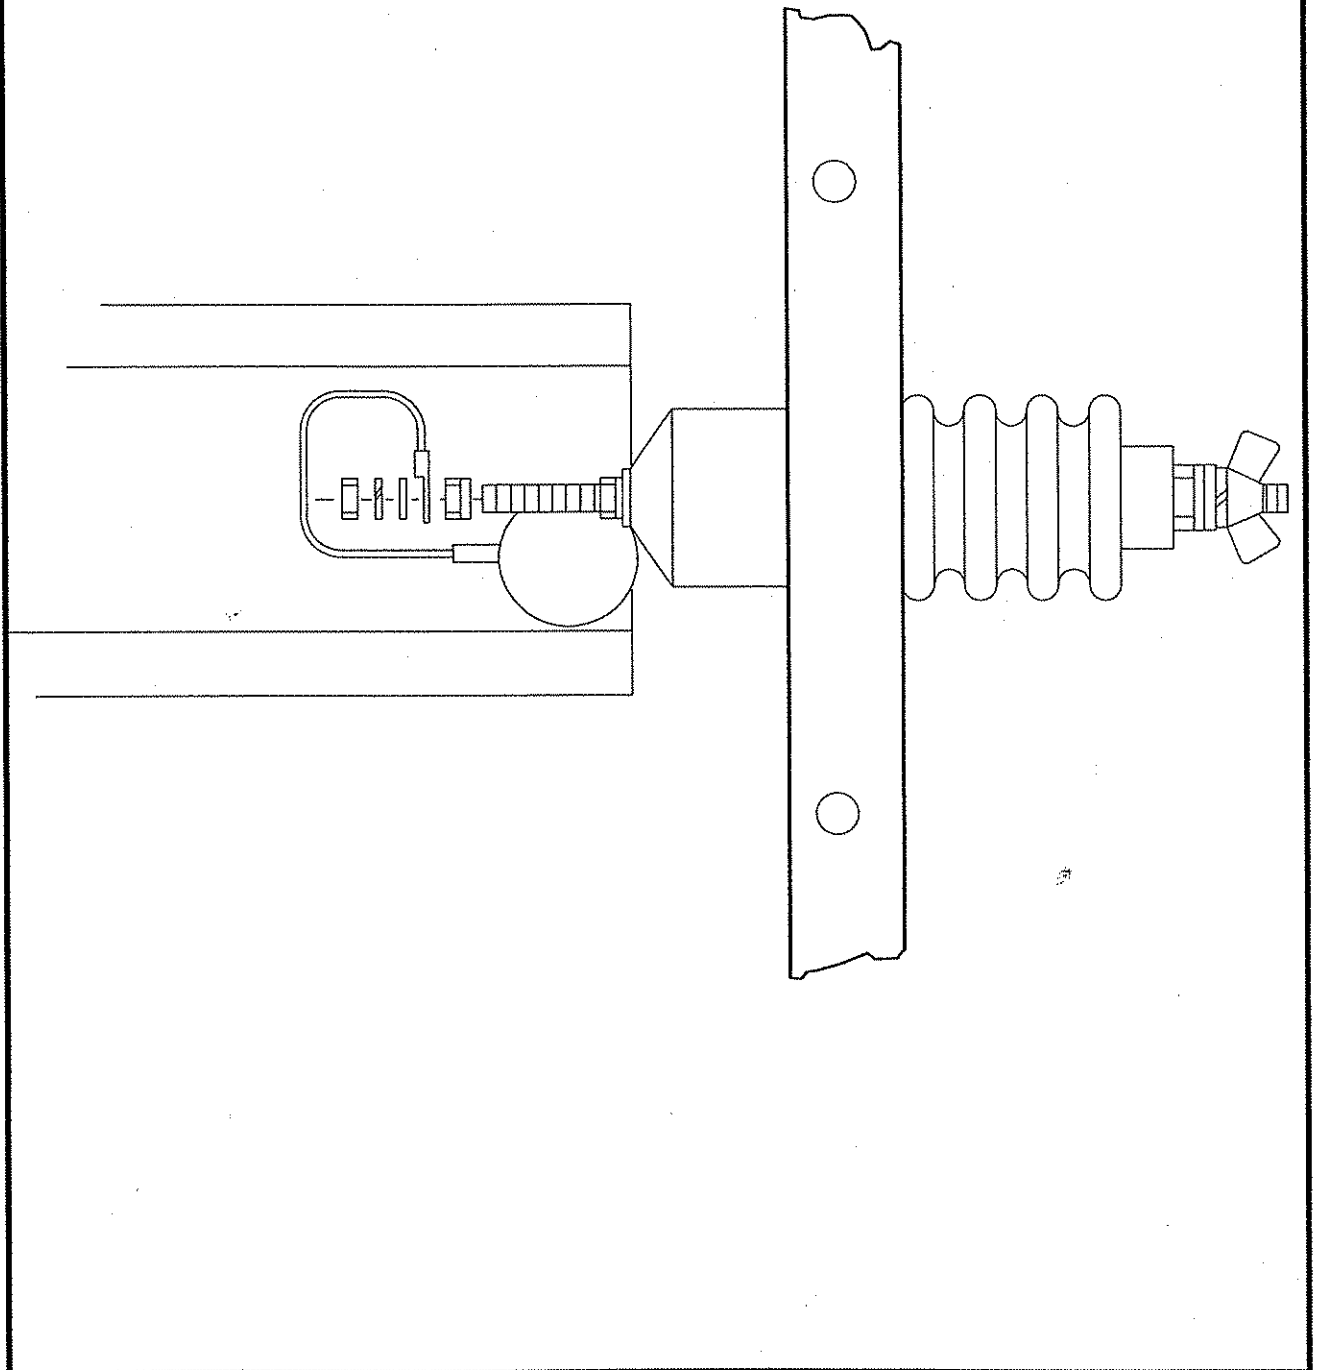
Assembly/Disassembly of Antenna Output Lead
